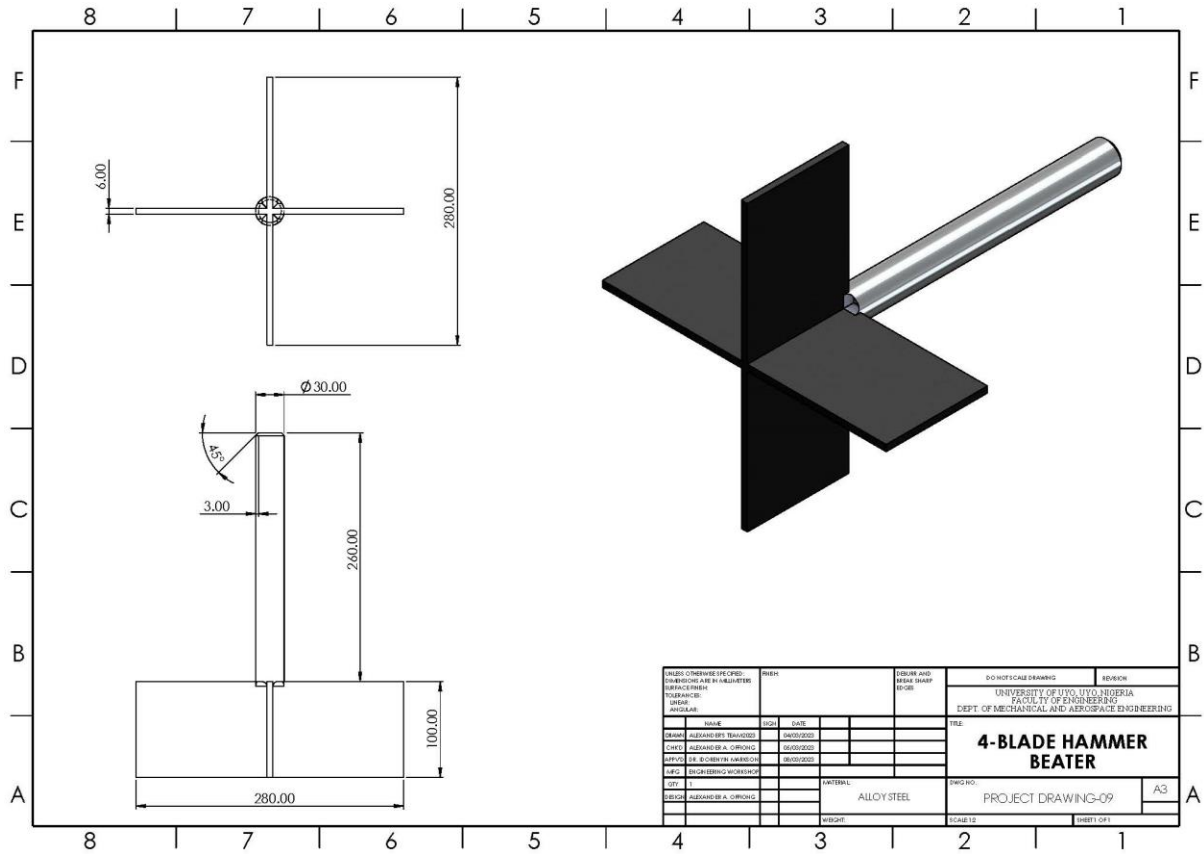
3 Components drawing showing Four Blade Hammer Shaft or Beater Shaft Head
